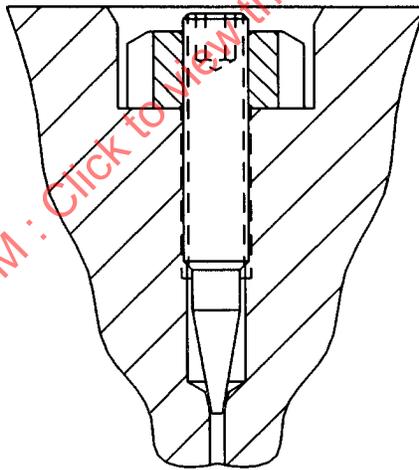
SPECIAL NUT AND ADJUSTING SCREW
